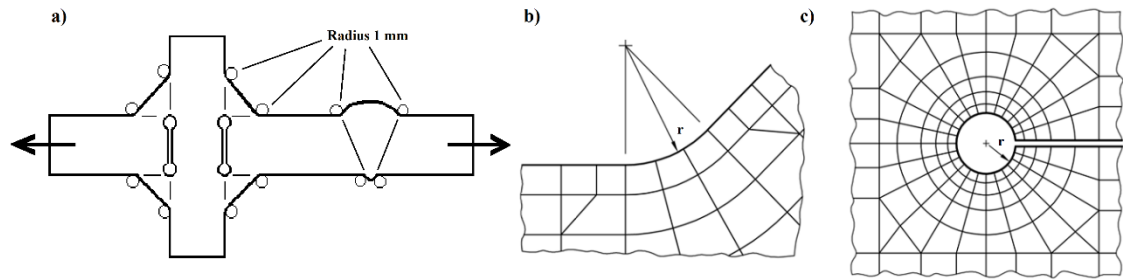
Cross sectional figures of weld joints with fictitious notches at weld toe and root. a) Fillet and butt weld b) Example of element mesh at weld toe or root c) Example of element mesh at root of fillet weld (Stenberg et al. 2015)
